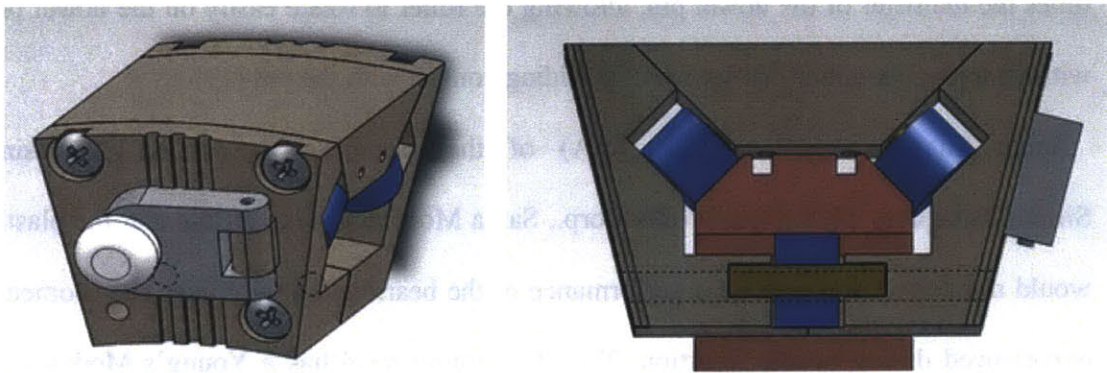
Roller bearing design incorporated into the carriage. Left: CAD of the completed carriage. Right: cross section view of the carriage riding on the hoop that contains a triangular profile (red).
